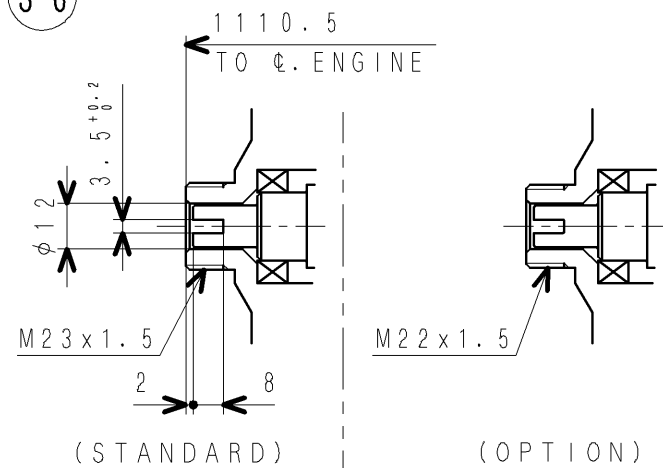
DETAIL OF THERMOMETER & THERMOSWITCH ADAPTER
